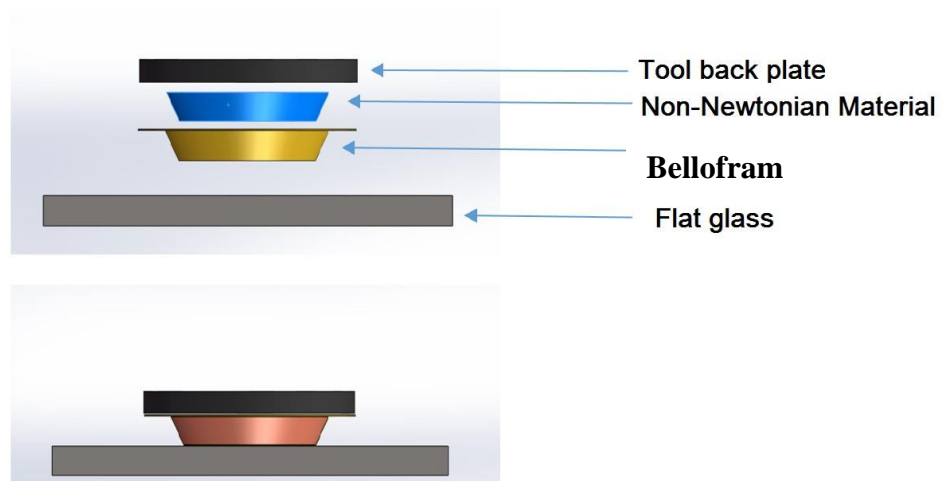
The separated parts (up) and assembly (bottom) for the non-Newtonian tool working on a flat surface.
